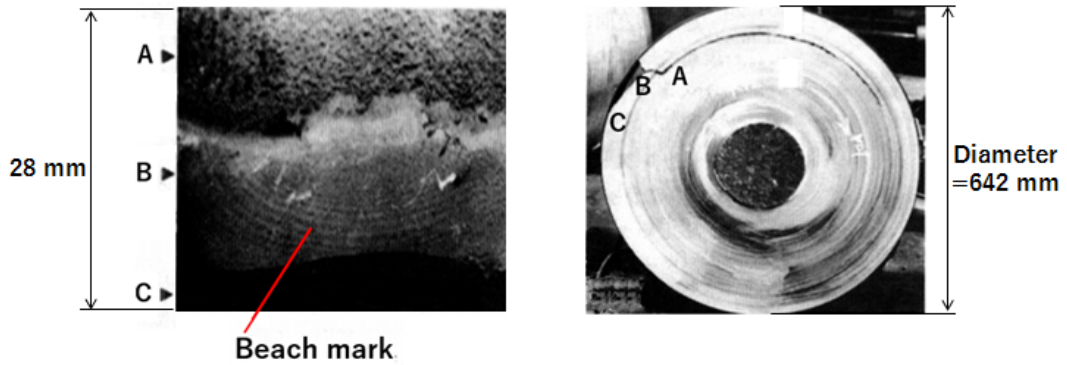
Failure at HSS/DCI boundary in bimetallic work roll (a) Fractured surface; A: Near boundary, B: Beach mark in shell, C: Roll surface, (b) Cross-section view of spalling crack
